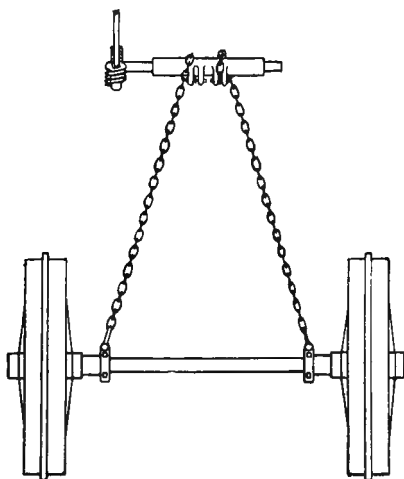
Typical Tractor Steering Gear, Front Truck Showing.
